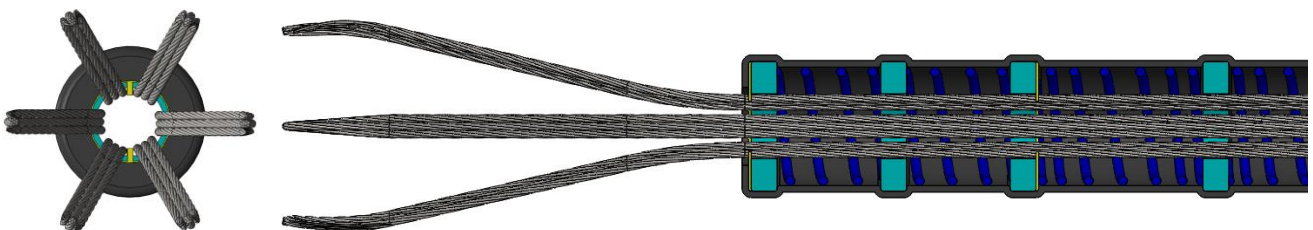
Final grasper design. Front and section view from the side. The grasper consists of wire ropes (grey), magnets (cyan), springs (blue), wire rope guides (yellow) and heat shrink tube (black).
